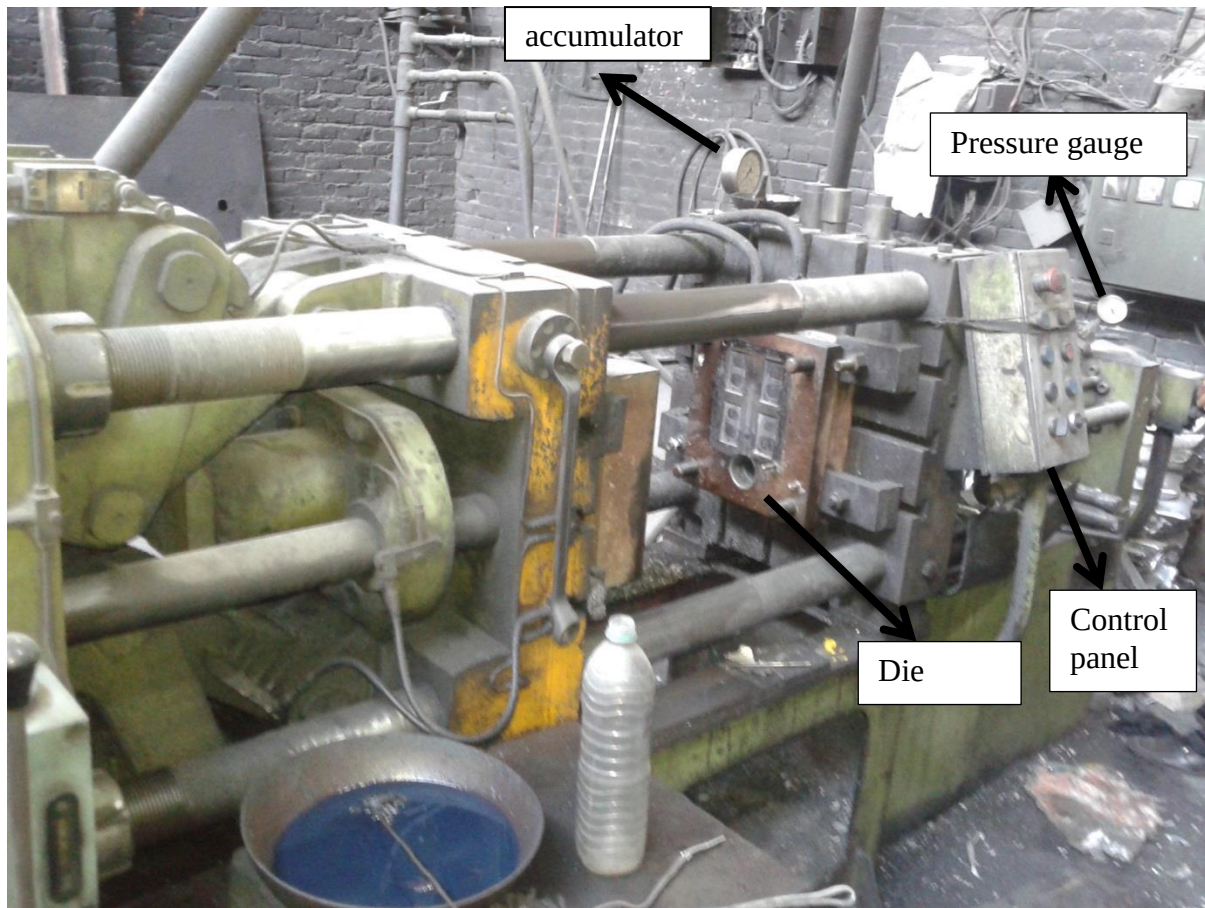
High Pressure Die Casting Machine (120 tons) at Focal Point (D-217), Patiala.
